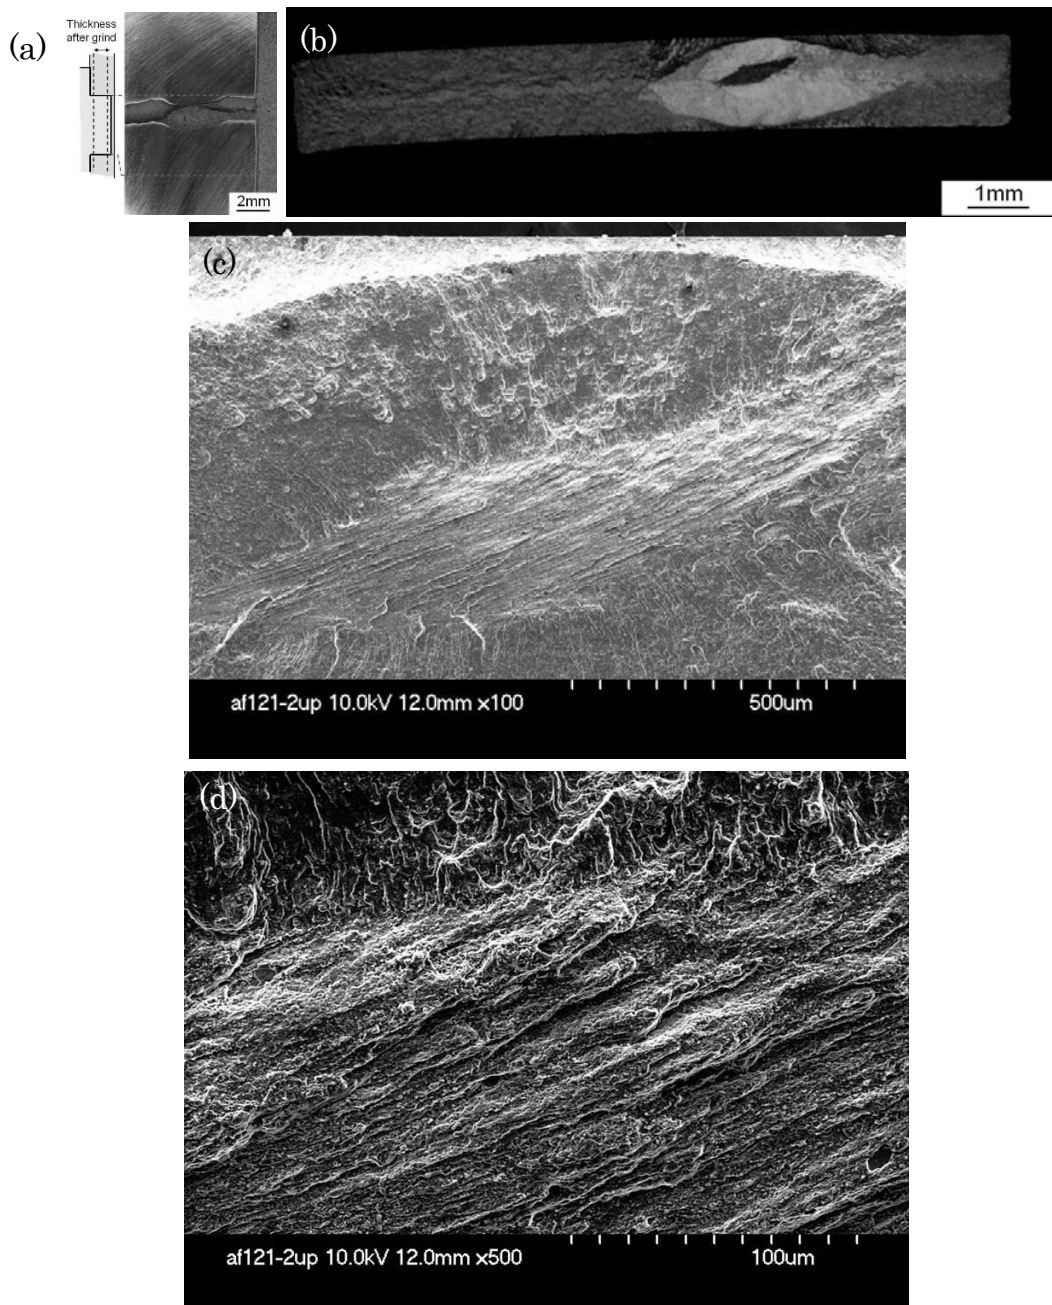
Typical fracture surface when an internal crevice is the crack origin
